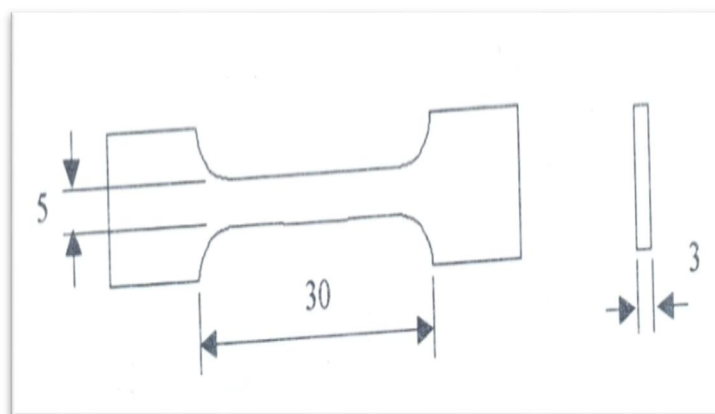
Tensile specimen for creep tests, all dimensions in mm.
